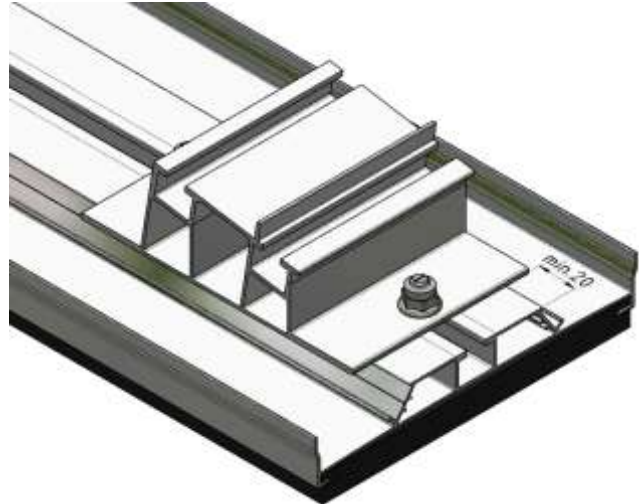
“Bottom support G3.1” mounted with both T-head screws
